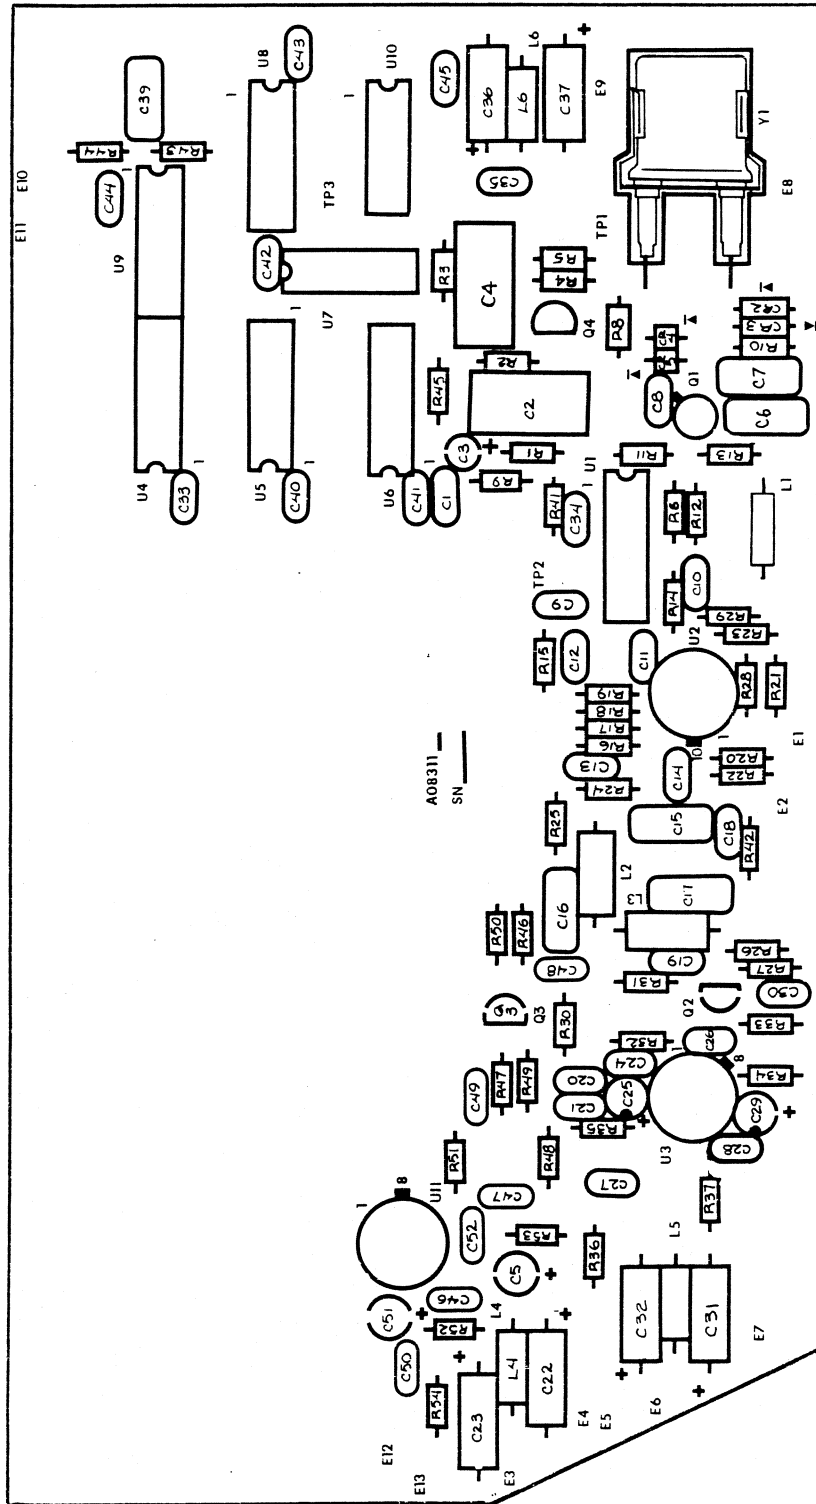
B. IF Converter A25, Circuit Card Assembly
